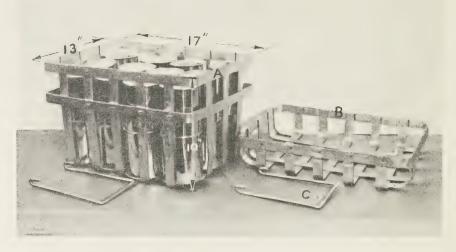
Iron Baskets for No. 1 Cannery A—cooking basket; B—exhausting basket; C—removable handles.
